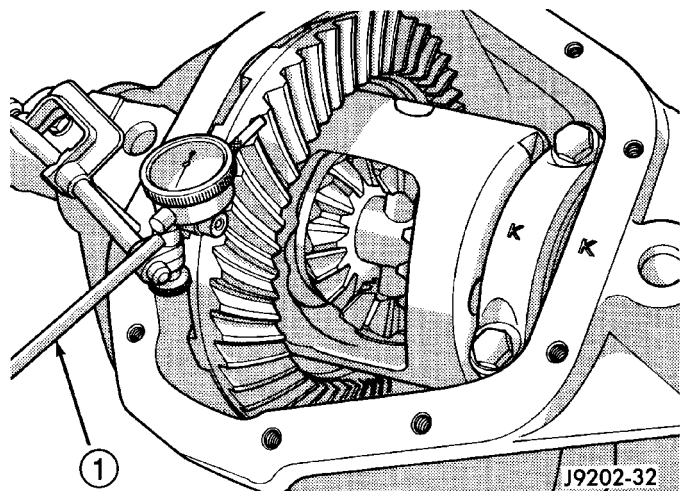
RING GEAR BACKLASH MEASUREMENT
